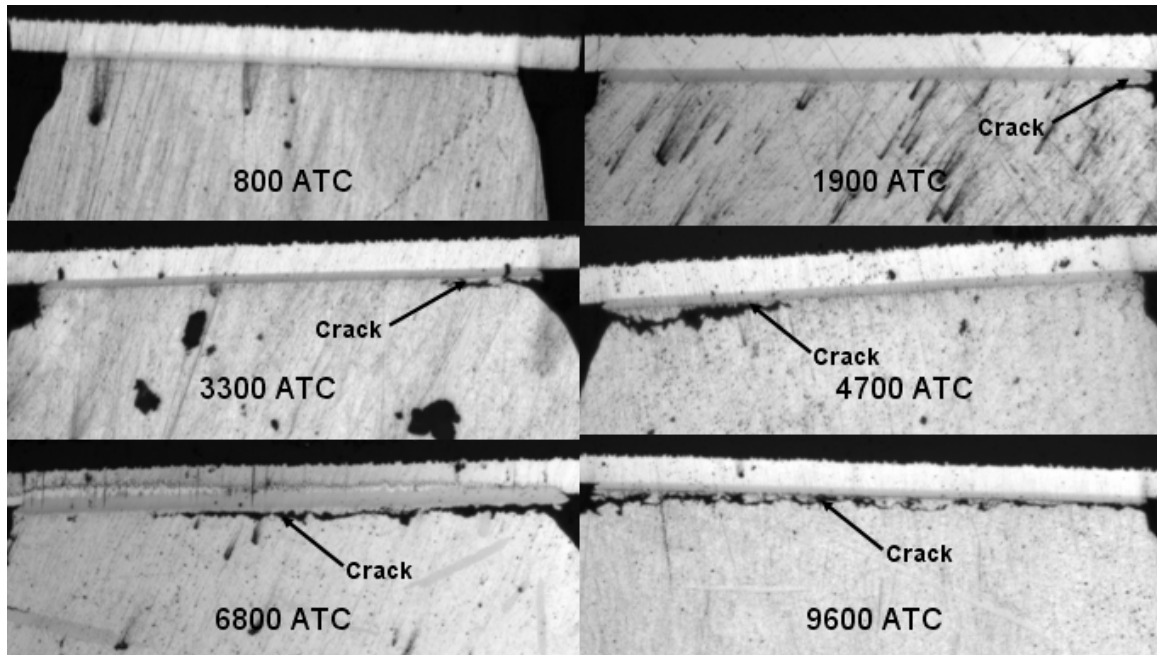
Fatigue crack growth for a solder joint #12 in PBGA 676 package
